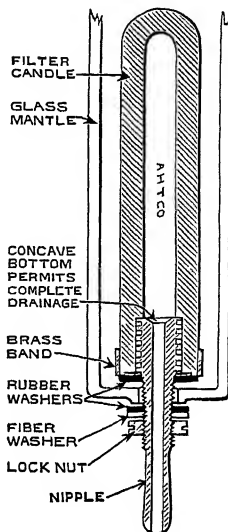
SECTIONAL VIEW OF MANDLER FILTER CYLINDER
